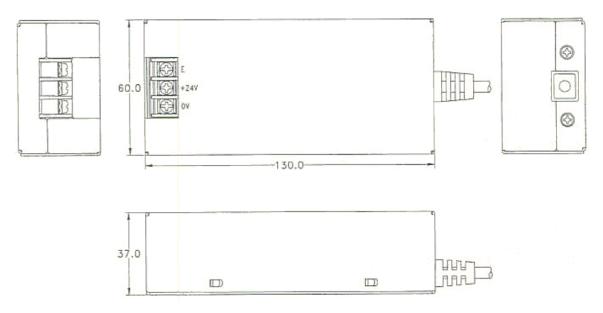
24V/48V DC Power Adapter Dimensions (millimeters)
